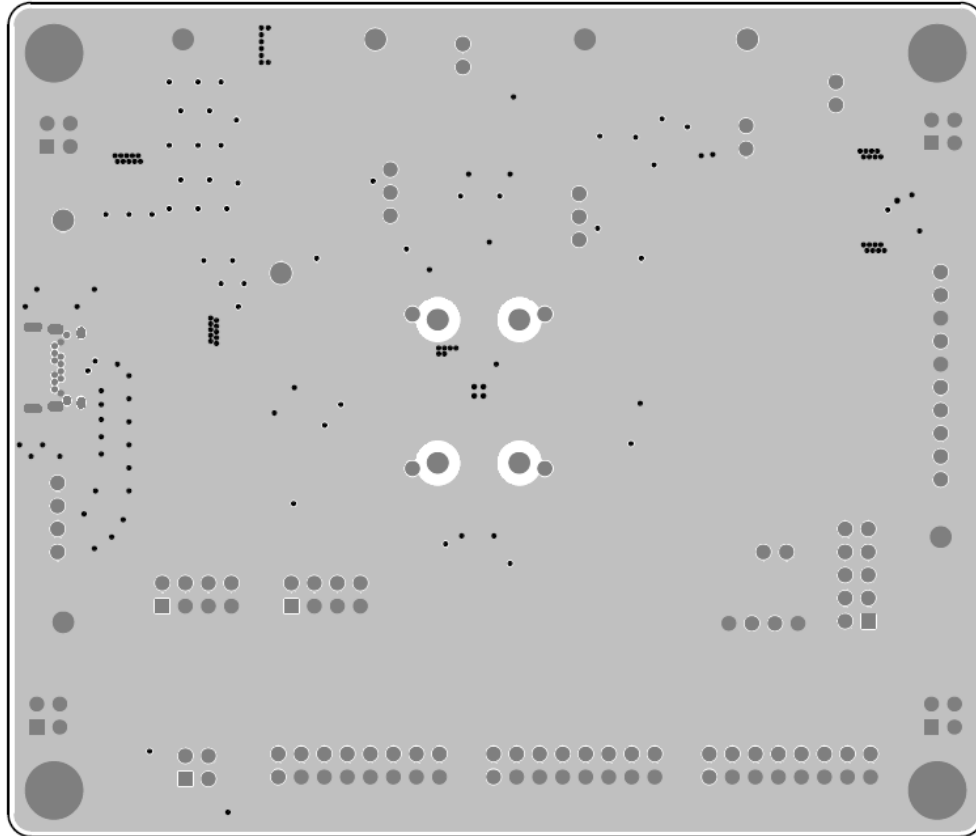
PCB Layout—Inner Side (2<sup>nd</sup> Layer)
